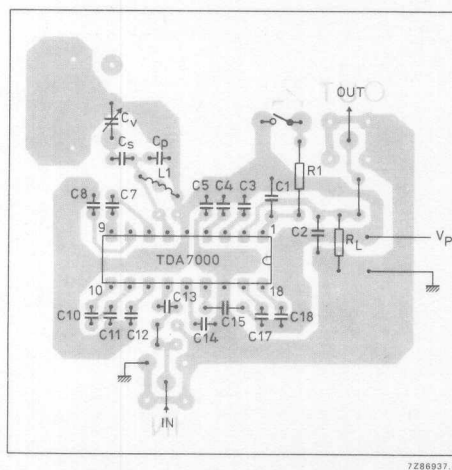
Component side of printed-circuit board showing component layout used for the circuit of Fig. 4.
